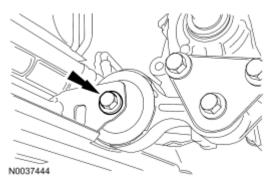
Locating Engine Roll Restrictor Bolt Courtesy of FORD MOTOR CO.
